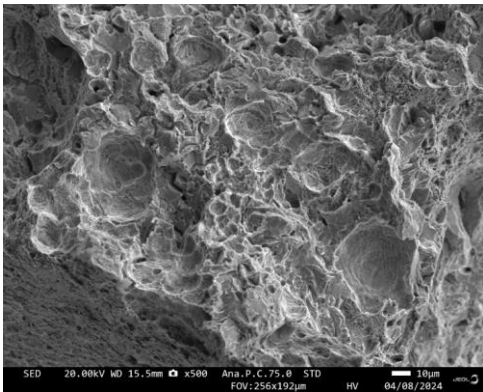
Fracture surface bolt A near center, dimple sections.
